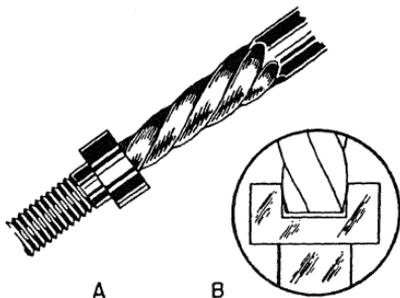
Removing an Allen head capscrew with a bolt extractor.
